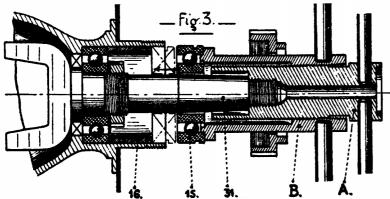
FITTING OUTER STUB AXLE BALL-RACE
